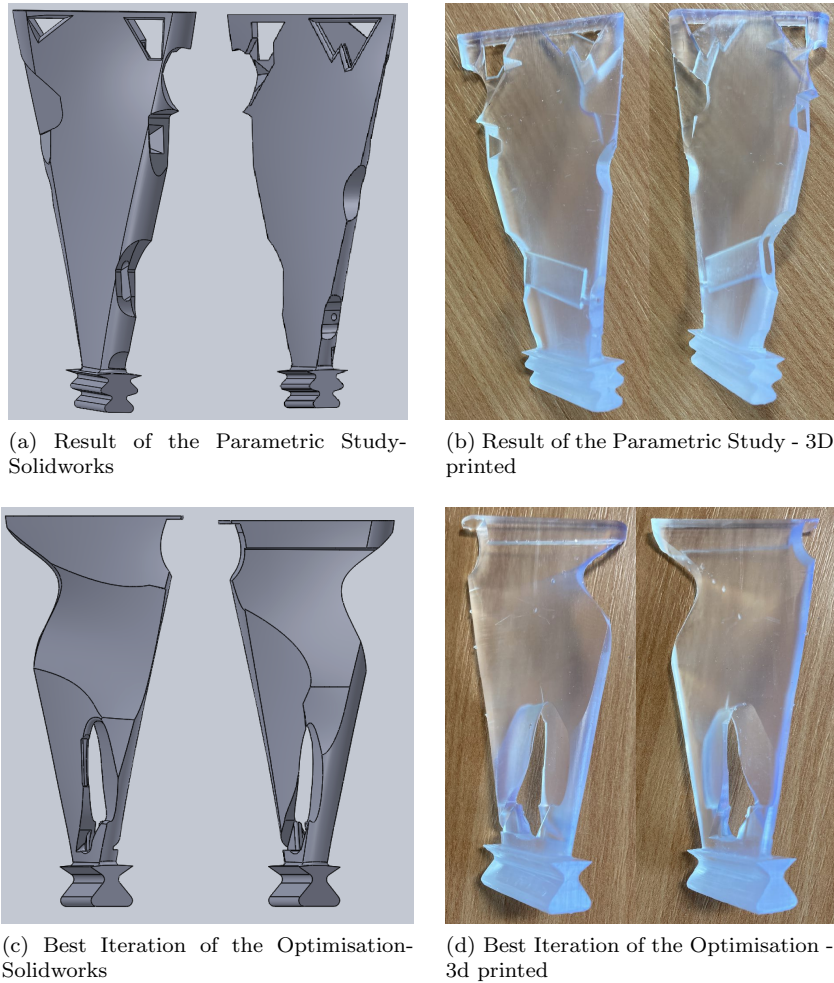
Optimised blades - CAD view (left) and 3D-printed geometries (right)
